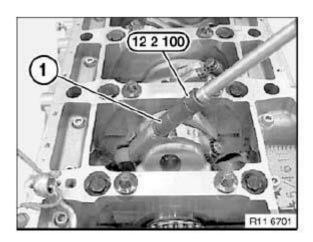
Releasing Connecting Rod Bolts With Special Tool (12 2 100) Courtesy of BMW OF NORTH AMERICA, INC.
